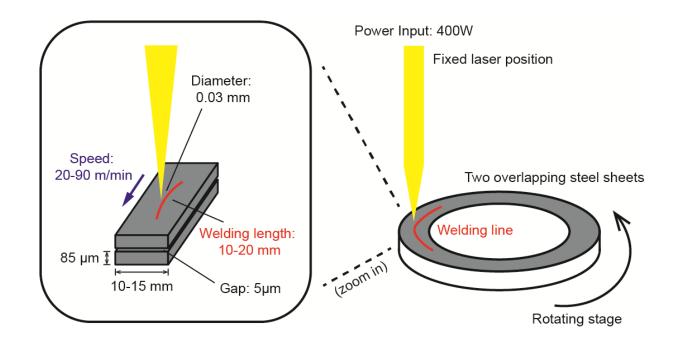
Welding Test Fixture with Rotating Stage
